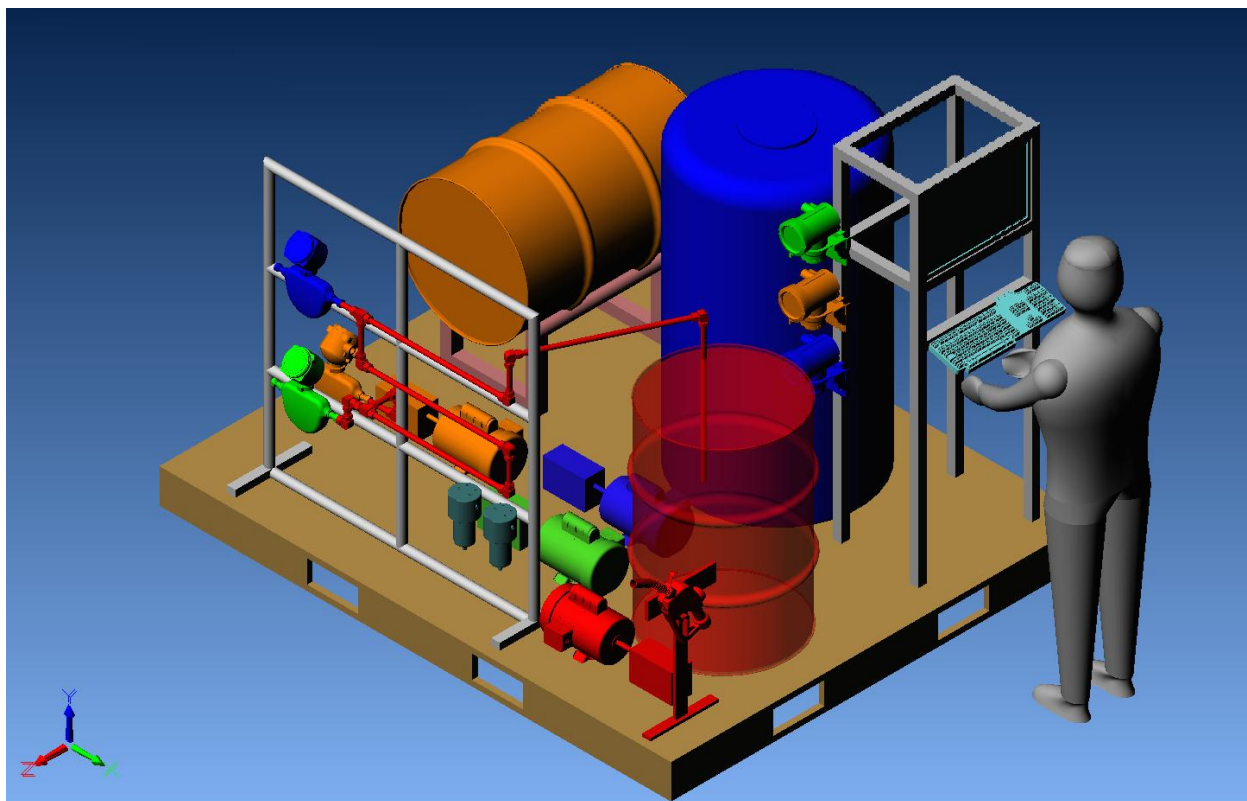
Technology Demonstrator Blending Unit Concept Layout
